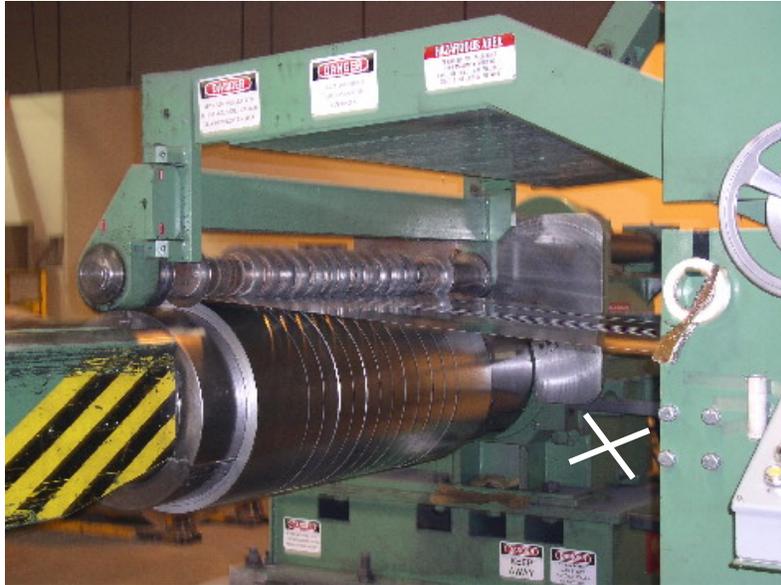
A picture of the product being wound on the rewind cylinder. The “X” marks the area where the victim entered the machine from the other side and got entangled in the cut steel sheet.
